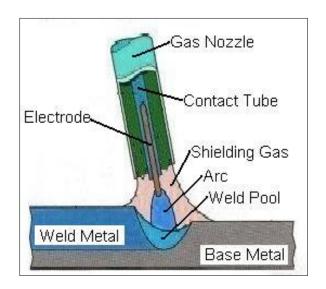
Schematic of Metal Inert Gas (MIG) Welding
